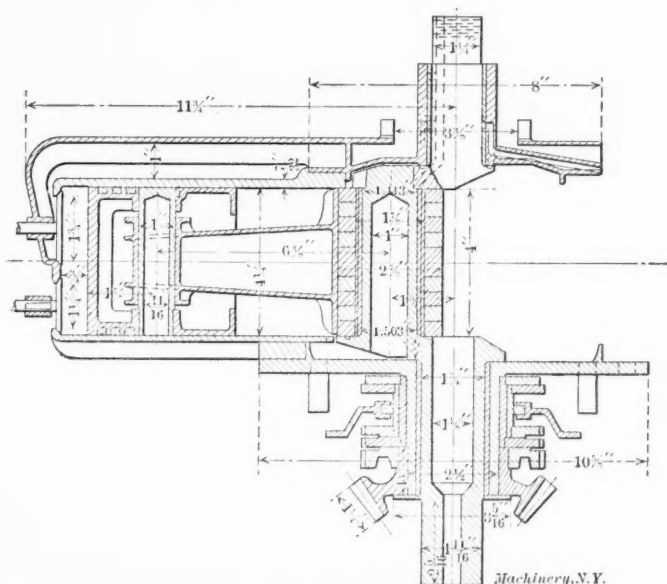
Vertical Section through a Cylinder and the Crank-shaft, showing Method of attaching Connecting-rods to the Crank-pin.
